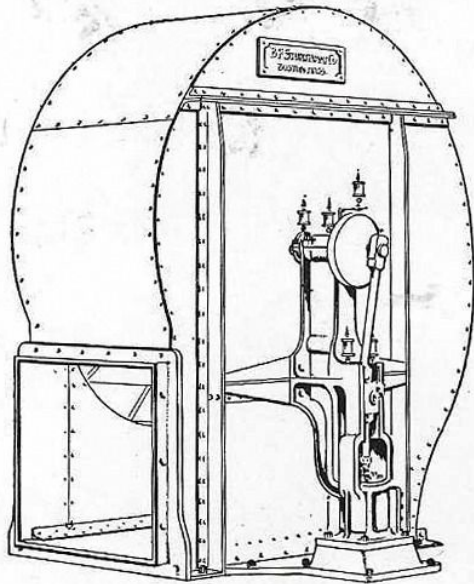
BOTTOM HORIZONTAL DISCHARGE, RIGHT HAND.
